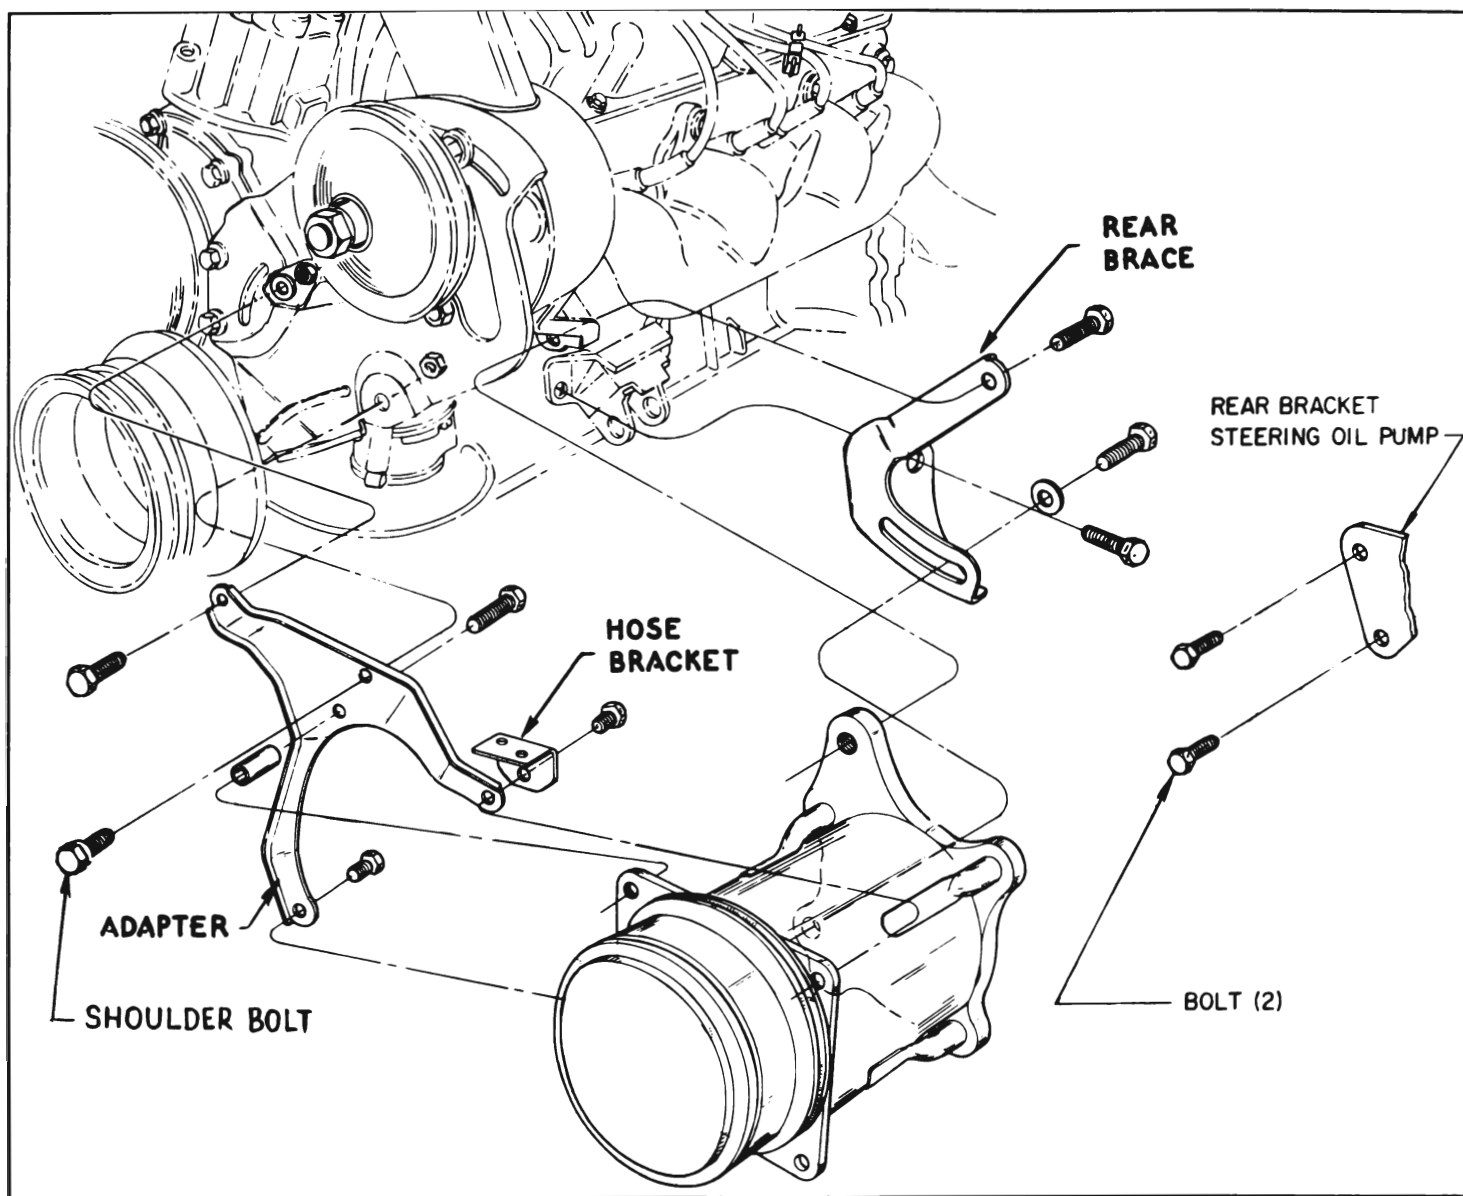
Compressor Mounting with Power Steering - V-8 Engine
